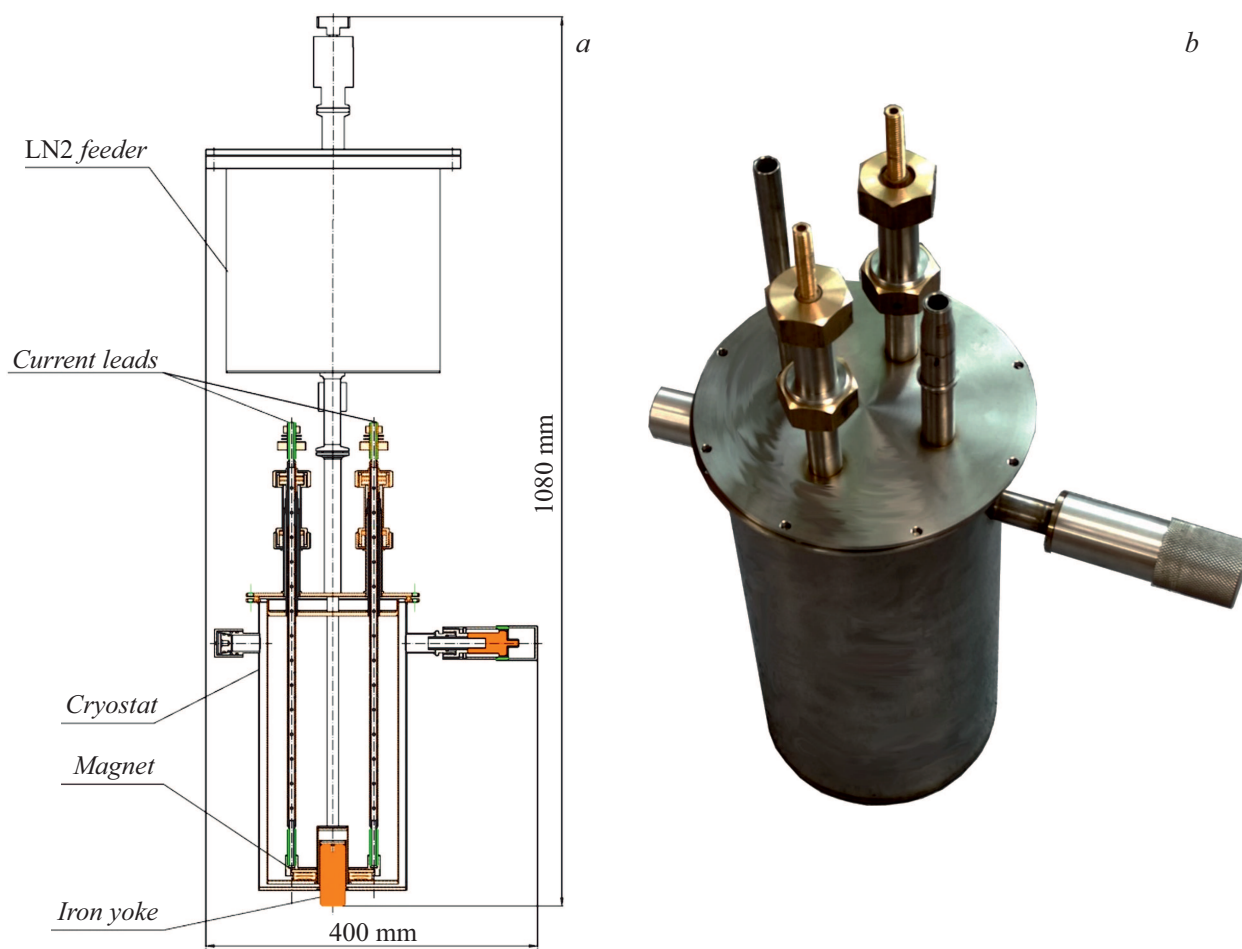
Overall dimensions of the high-temperature superconducting magnetic system (a) and its cryostat assembly (b).
